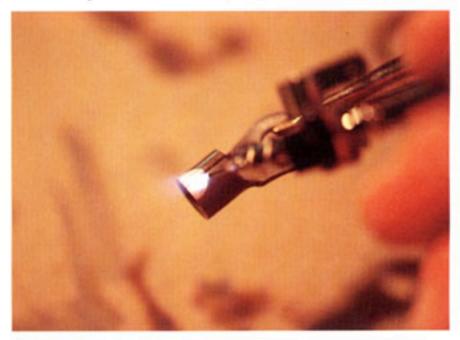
B. The reducing (de-oxidizing) zone of the flame shows clearly on the heated copper terminal. Closing the gap of such lug type terminals is done rapidly on automated production lines.
